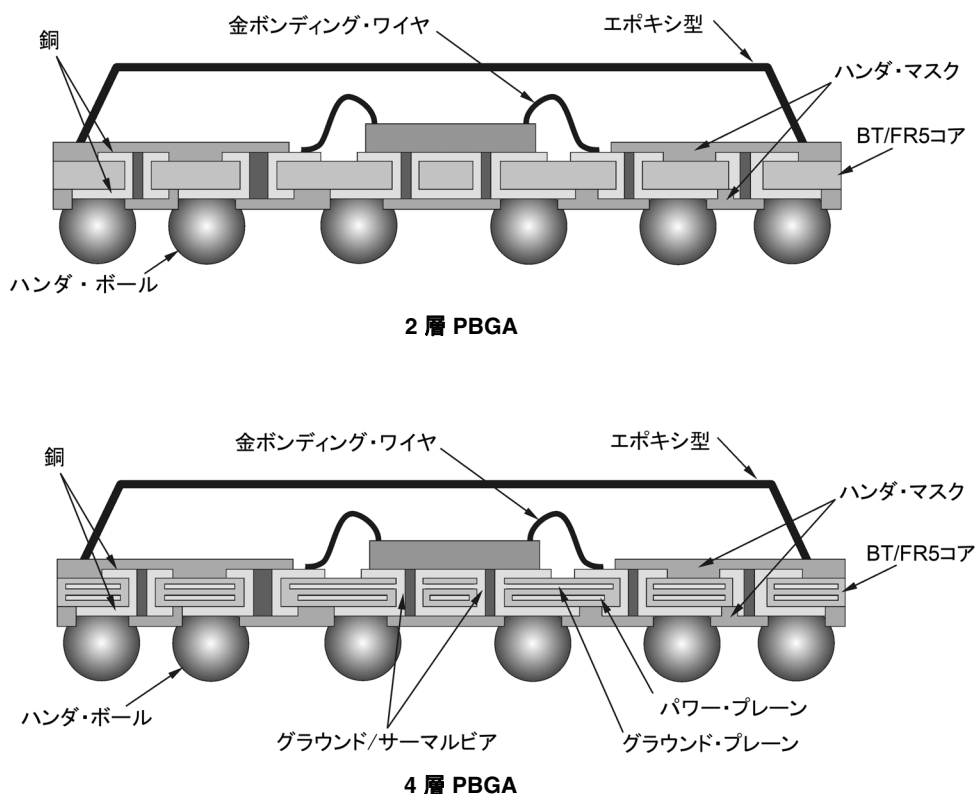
Cross-Sectional View of 2 and 4 Layer PBGA
